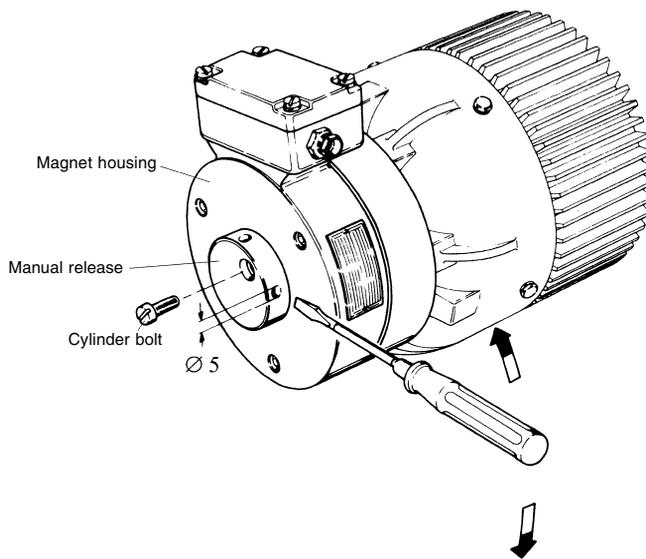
Brake – Types E./Z..075 and Z..100 – with latching manual release
